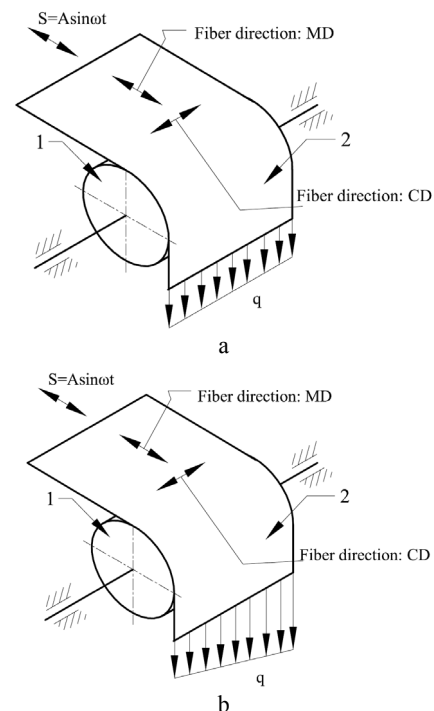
Paperboard sheet loading schemes: a – scheme of symmetric paperboard load, b – scheme of asymmetric paperboard load: 1 – impression cylinder, 2 – paper, q – vertical static load, MD – machine direction, CD – cross machine direction, s – displacement
